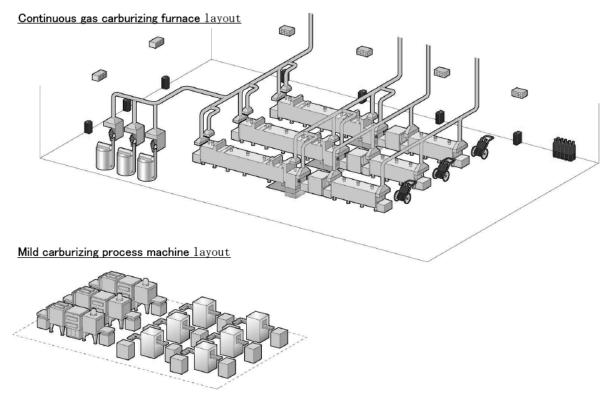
Example of continuous gas carburizing furnace layout and Mild carburizing process machine layout.
